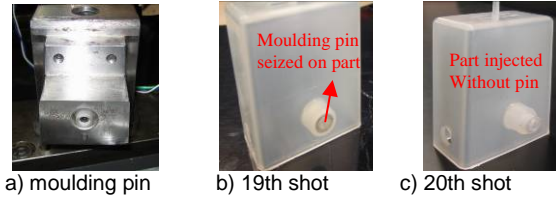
Moulding pin part zone when using Somos 11120 pin. a) moulding pin fitted in the mould; b) and c) aspect of failure
